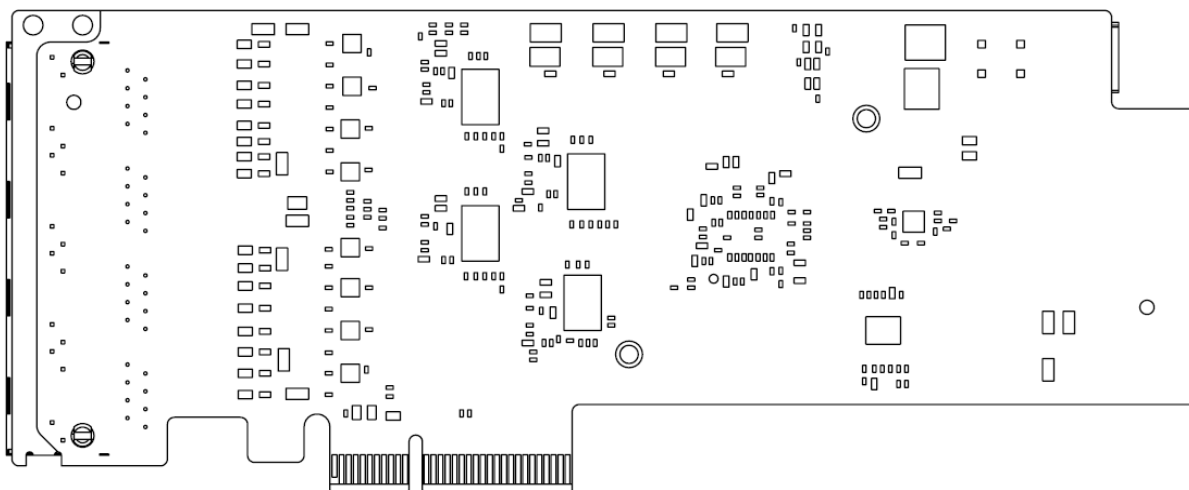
PCIe-GIEV4V PCB layout (Bottom)
